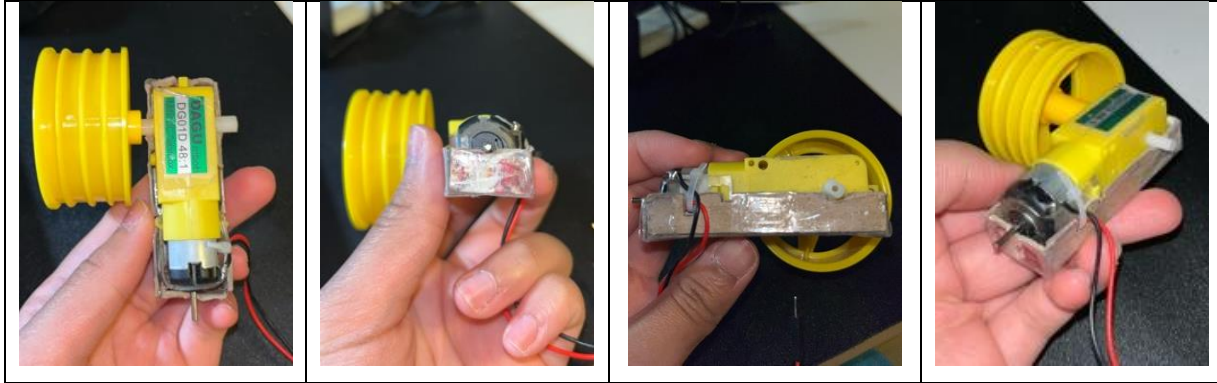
Orthographic and Isometric views of the first prototype mounting the TT motor
